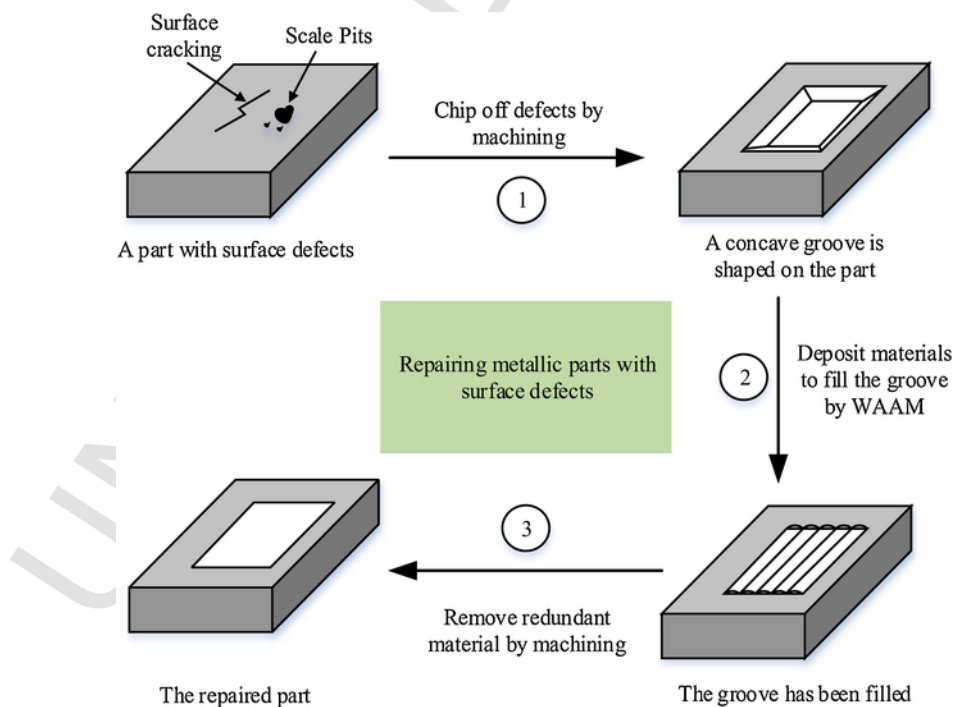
The workflow of repairing parts with surface defects based on machining and WAAM.
